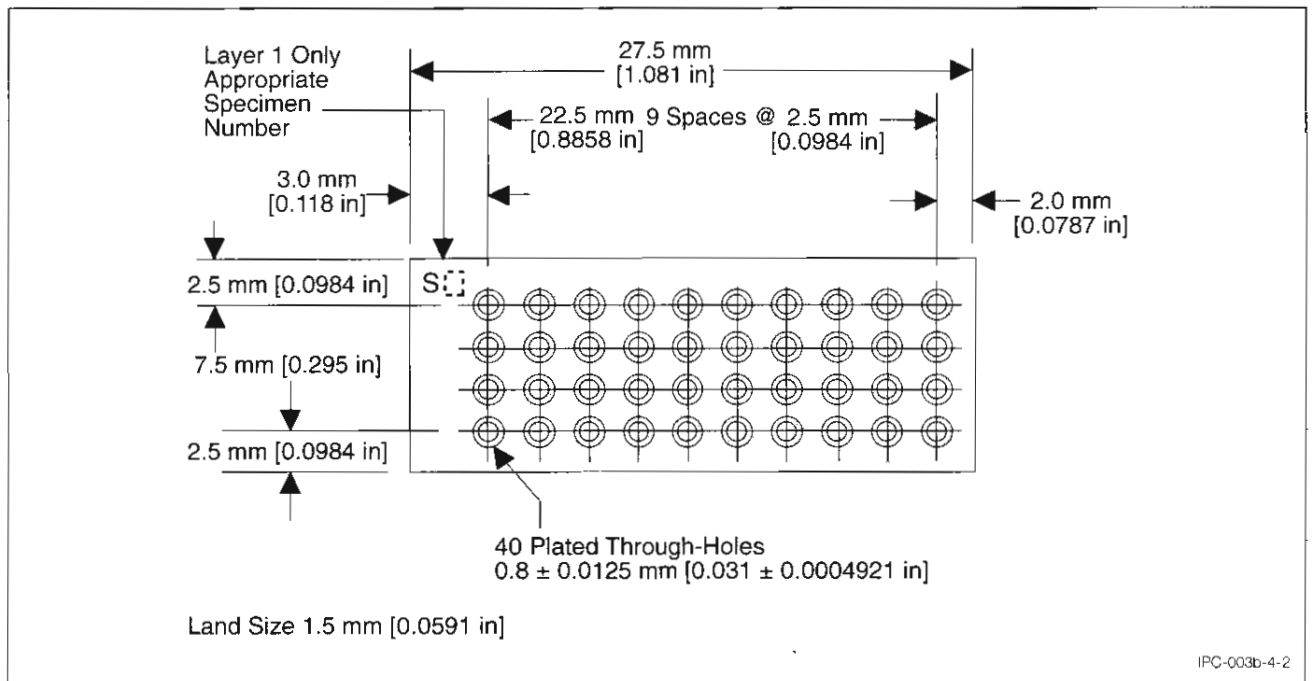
Suggested Test Specimen for Plated-Through Holes
